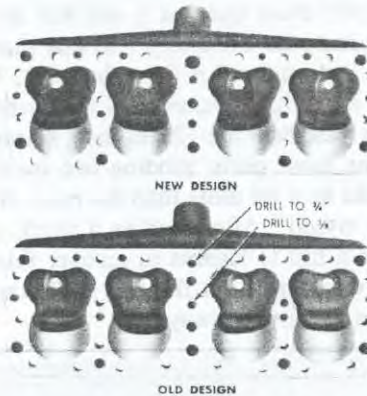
Cylinder Heads and Gaskets (Old Style 41T and New Style 59A)
